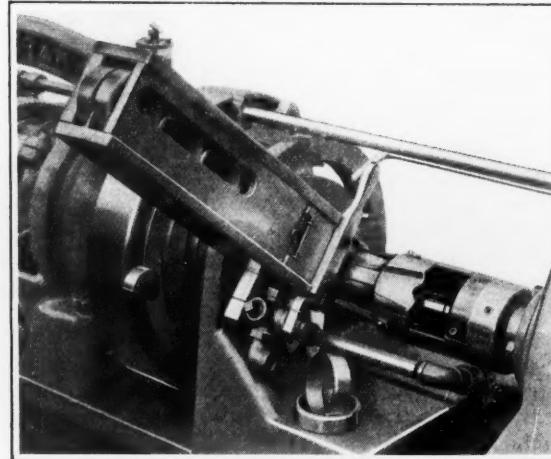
Multiple Magazine Feed for Hall Planetary Milling Machine
